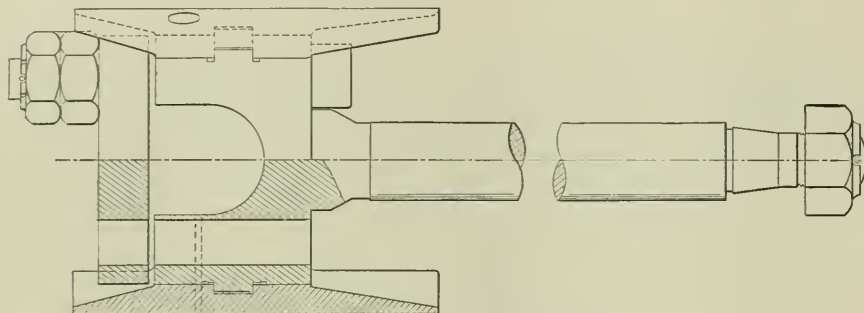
CROSSHEAD AND PISTON ROD FORGED IN ONE PIECE
